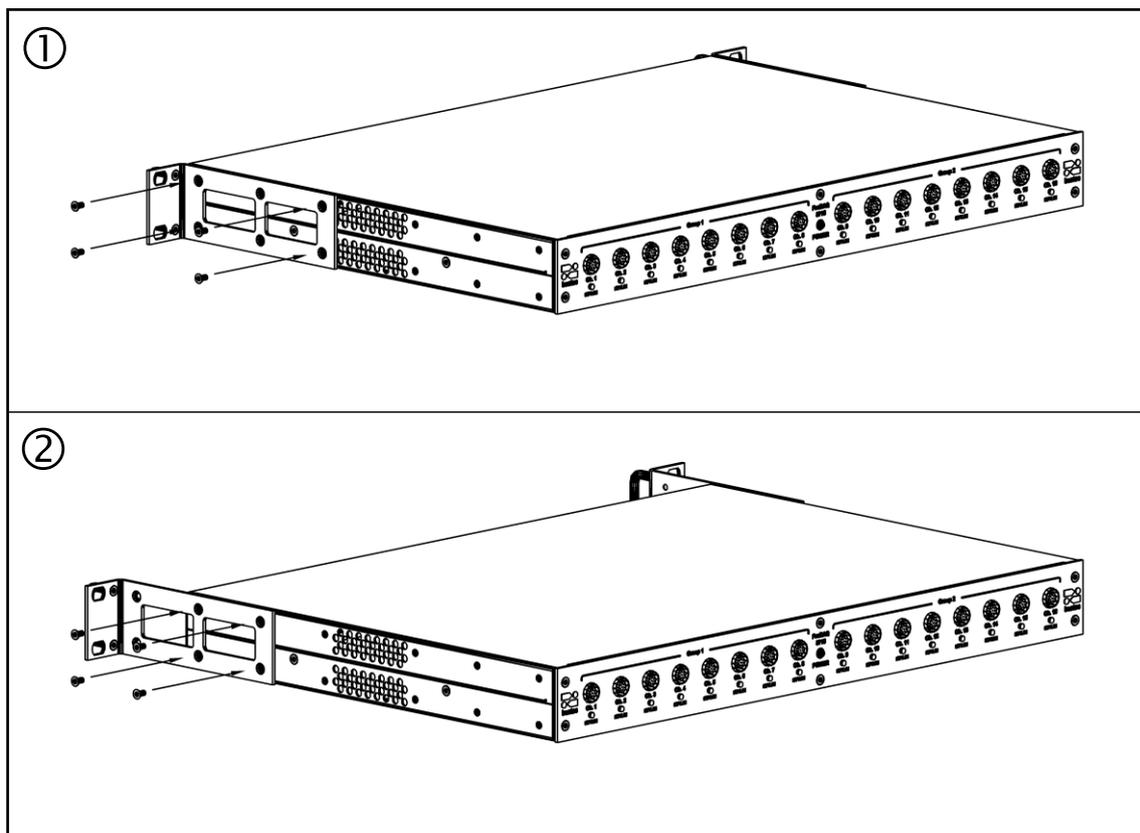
Rack-mount Brackets Attachment Positions for Reverse Mounting
